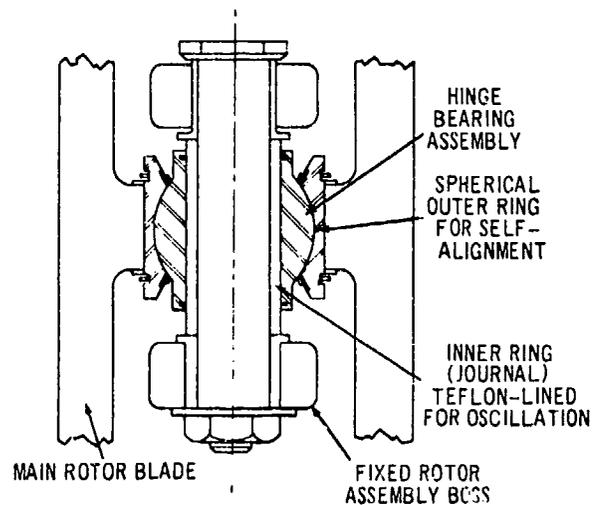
Self-aligning, Teflon-lined Bearing
